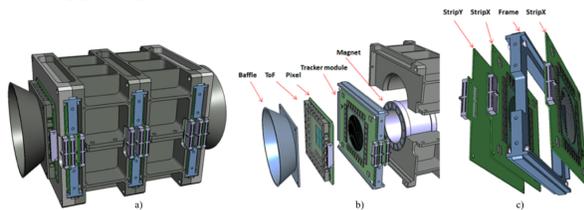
a) Engineering drawing of Mini.PAN. b) Exploded view showing the baffle, the TOF module coupled to the Pixel module, the tracker module and part of a magnet sector. c) Exploded view of a tracker module.
